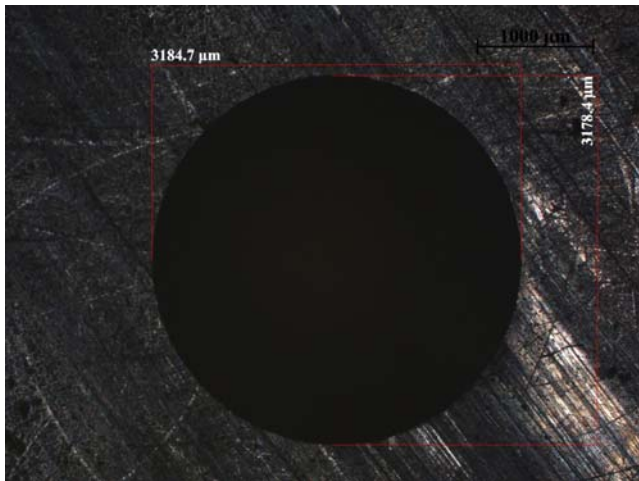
Measurements made of drill bushing with microscope proved to be just as inaccurate as manufacturer tolerances
